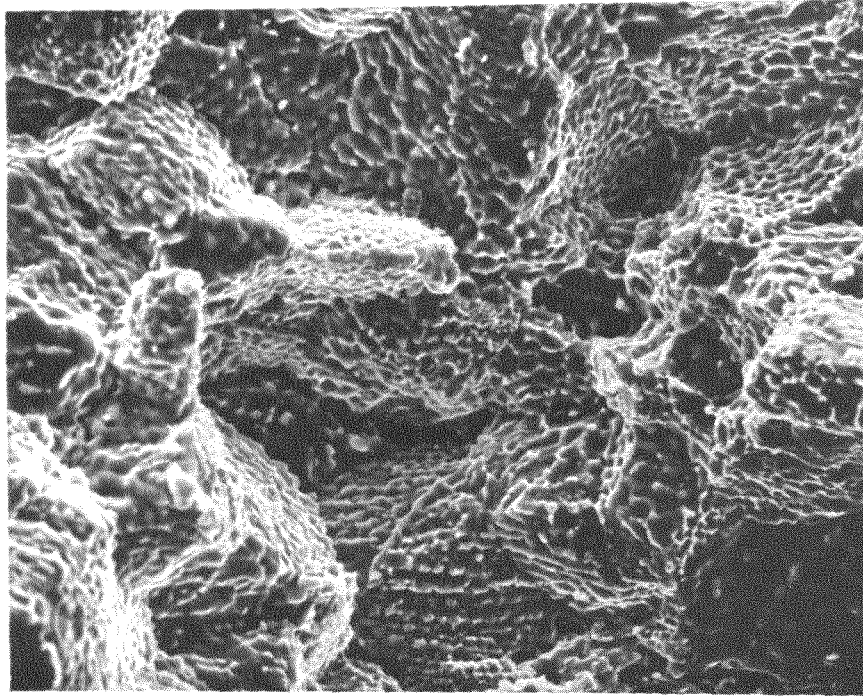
Stereo view of the intergranular fracture of an implanted specimen (#18, Table III) creep-tested at 800°C (SEM 1250X).
